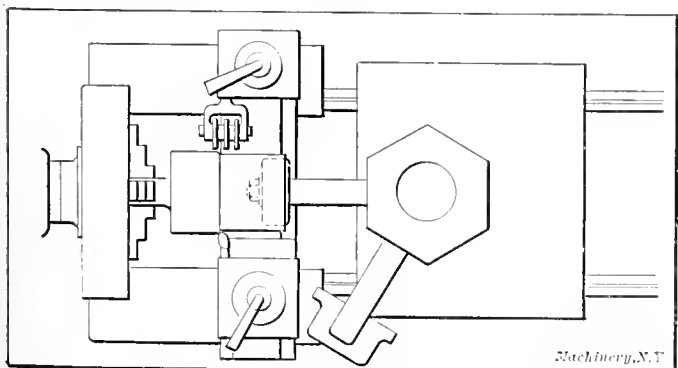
Rough-turning the Outside with Roller Support in Finished Part of Bore
